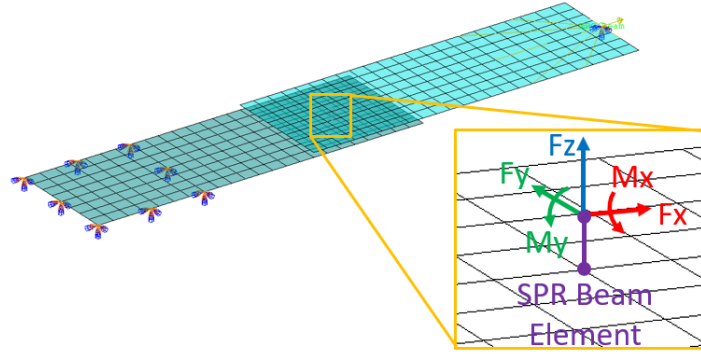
Detail view of bottom sheet and beam element with tractions at beam end (top sheet hidden)
